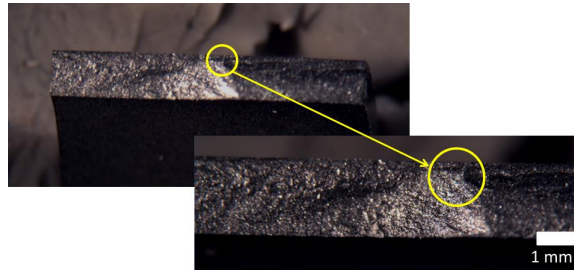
Example of Surface Flaw Identified for Hexoloy α -SiC Under Diametral Compression Conditions.
